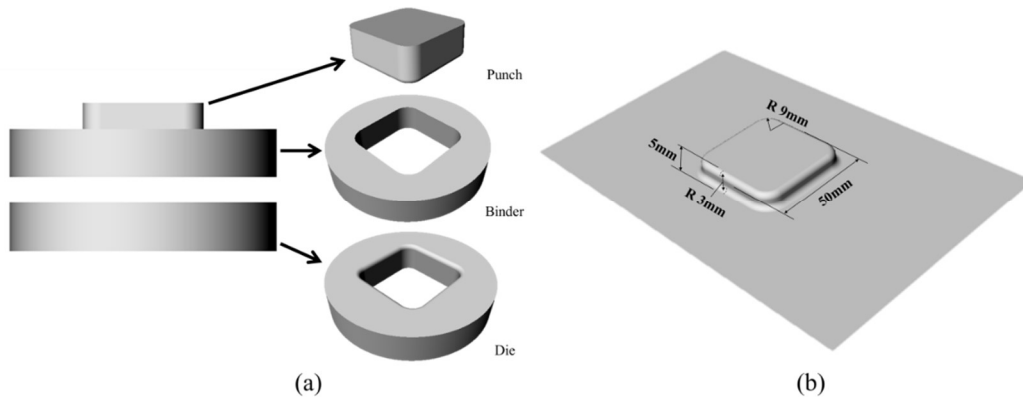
(a) Deep drawing system; (b) Geometrical features of the deep drawn component
